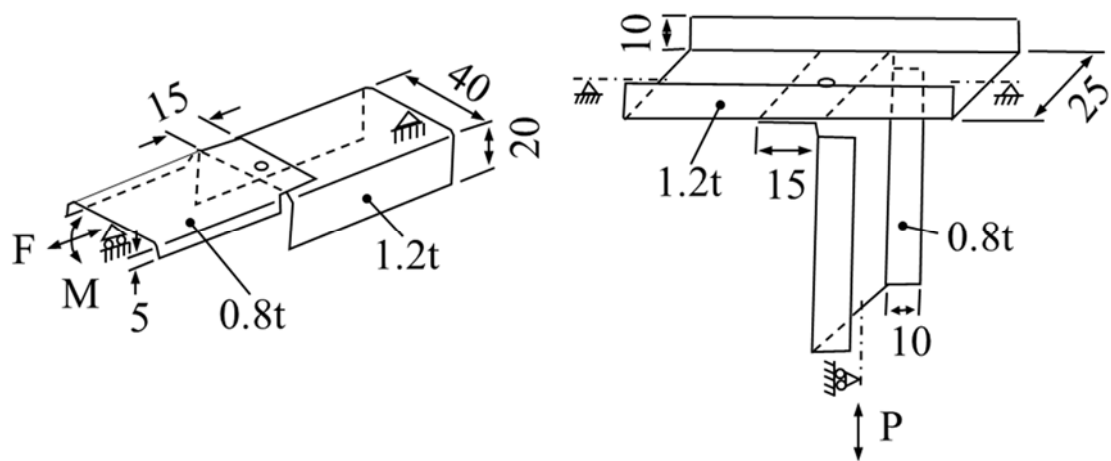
Spot welded joint specimens [1-14].
